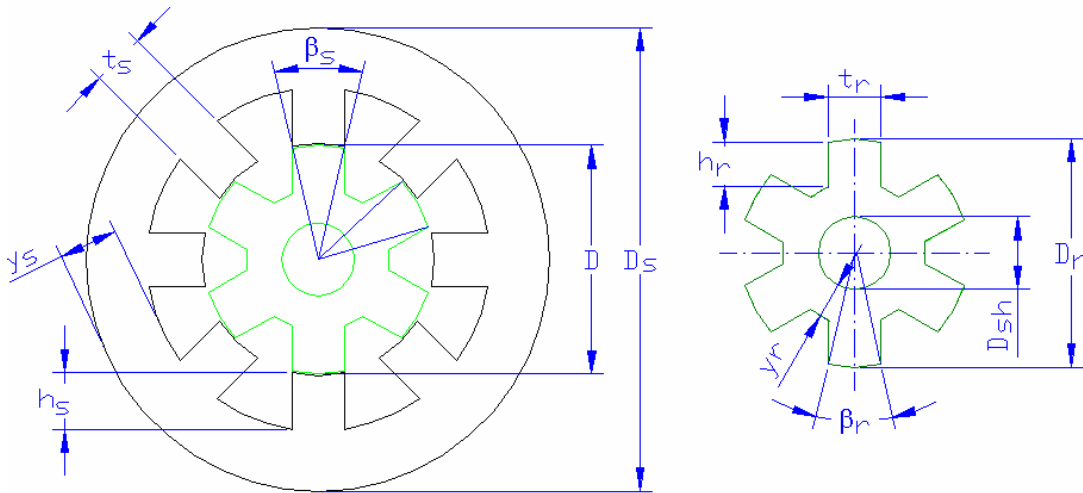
Cross section of an 8/6-SRM showing stator and rotor dimensioning parameters
